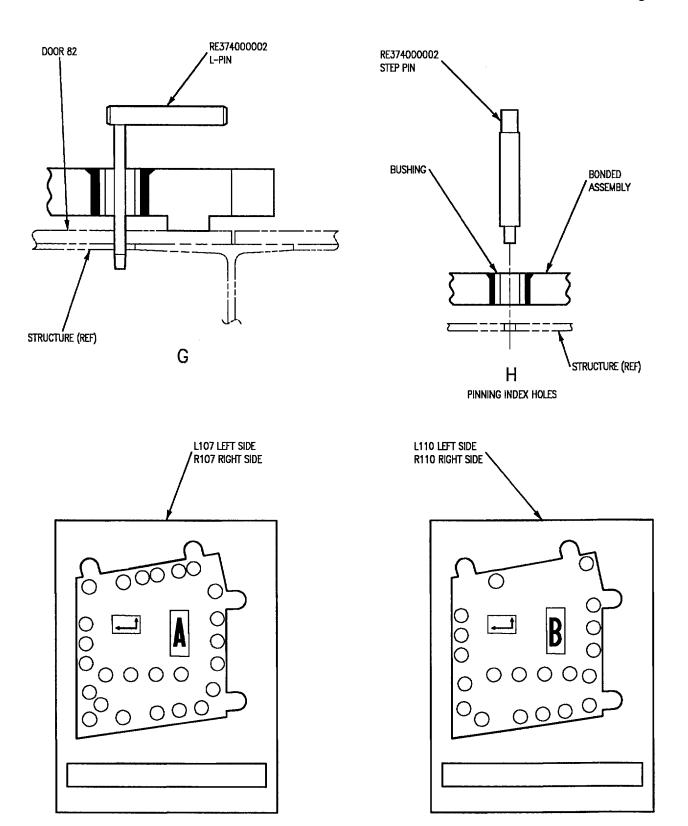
Installation of Plate Set for Drilling Door 82 and Substructure (Sheet 4)
